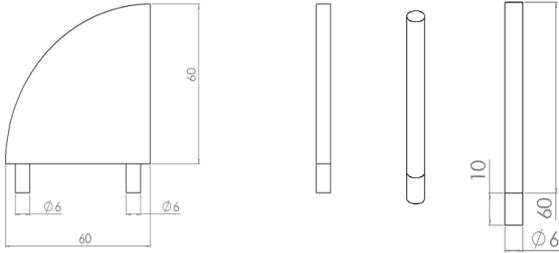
View of threshing peg of 1/4 circular disk type. Fig. 2 View of threshing peg of circular rod type.
